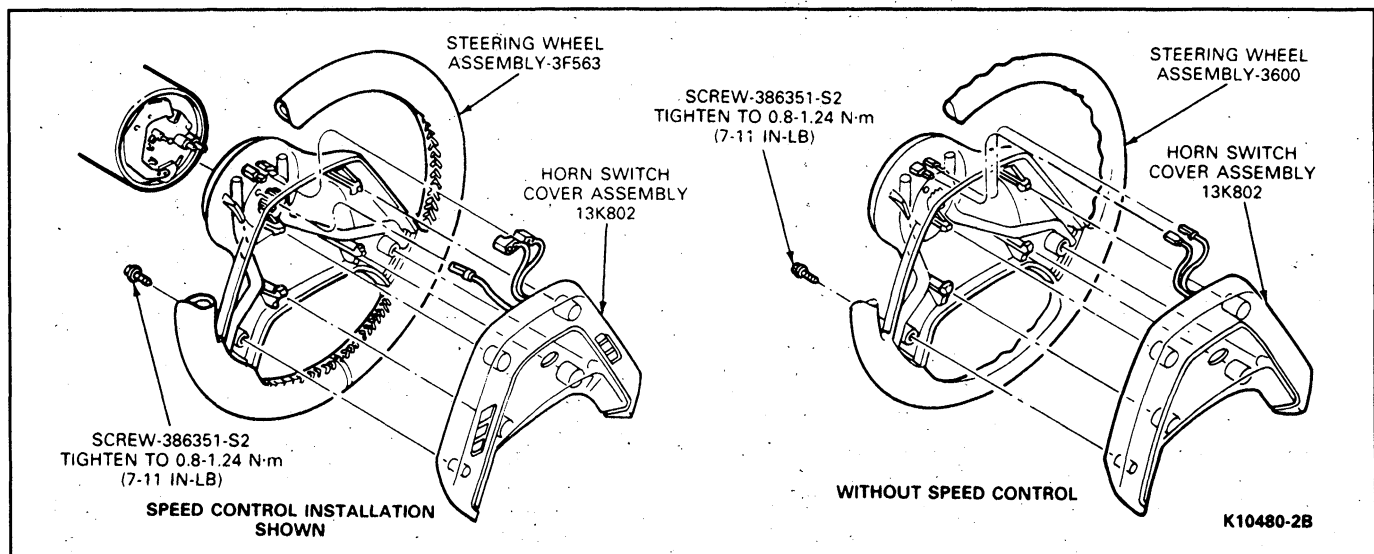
Horn Switch Cover Assembly F-150—F-350, F-Super Duty and Bronco
